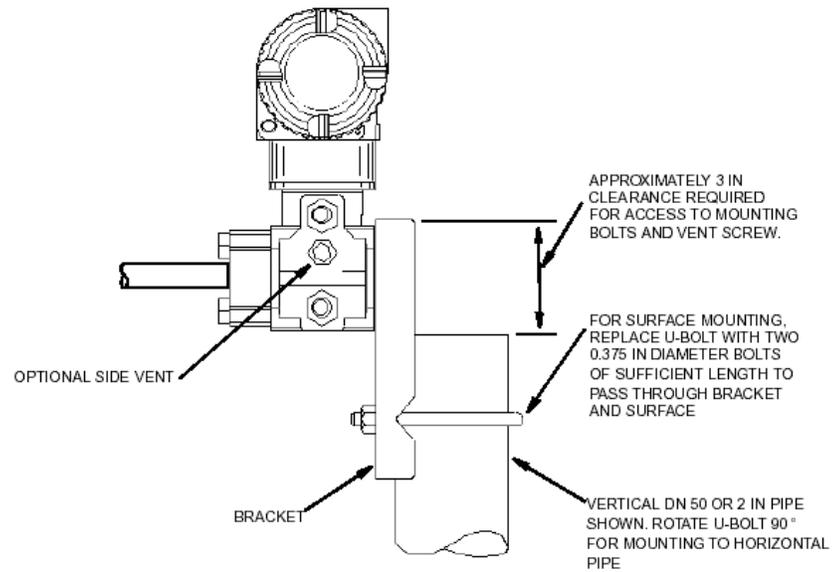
Mounting 4000 transmitter to a Pipe or Surface – Flange Mounting
